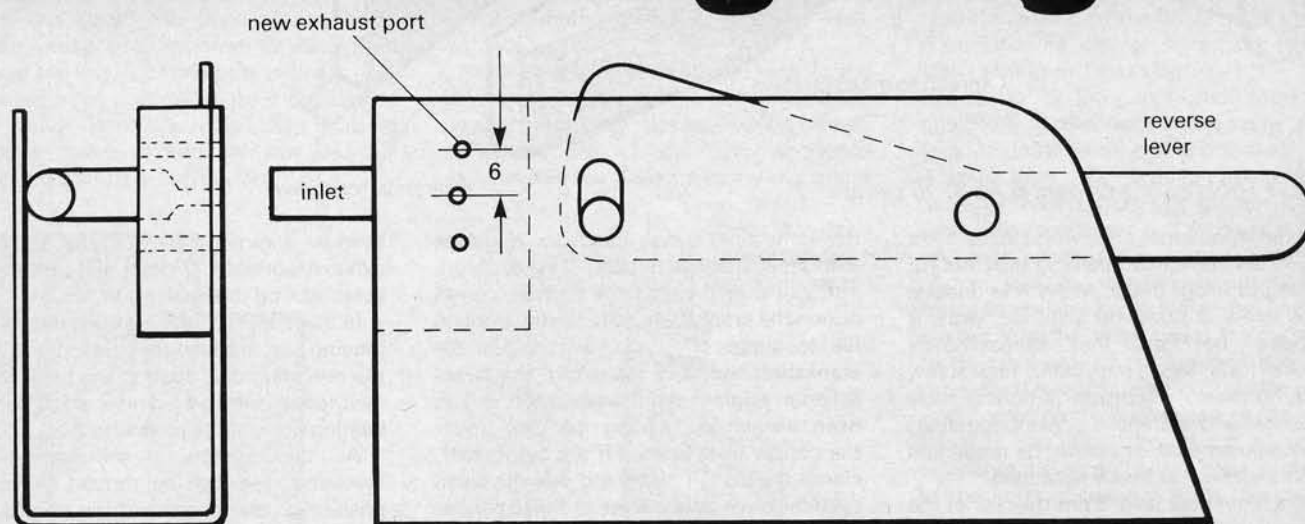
Engine mainframe and reverse lever showing new exhaust port and inlet pipe
